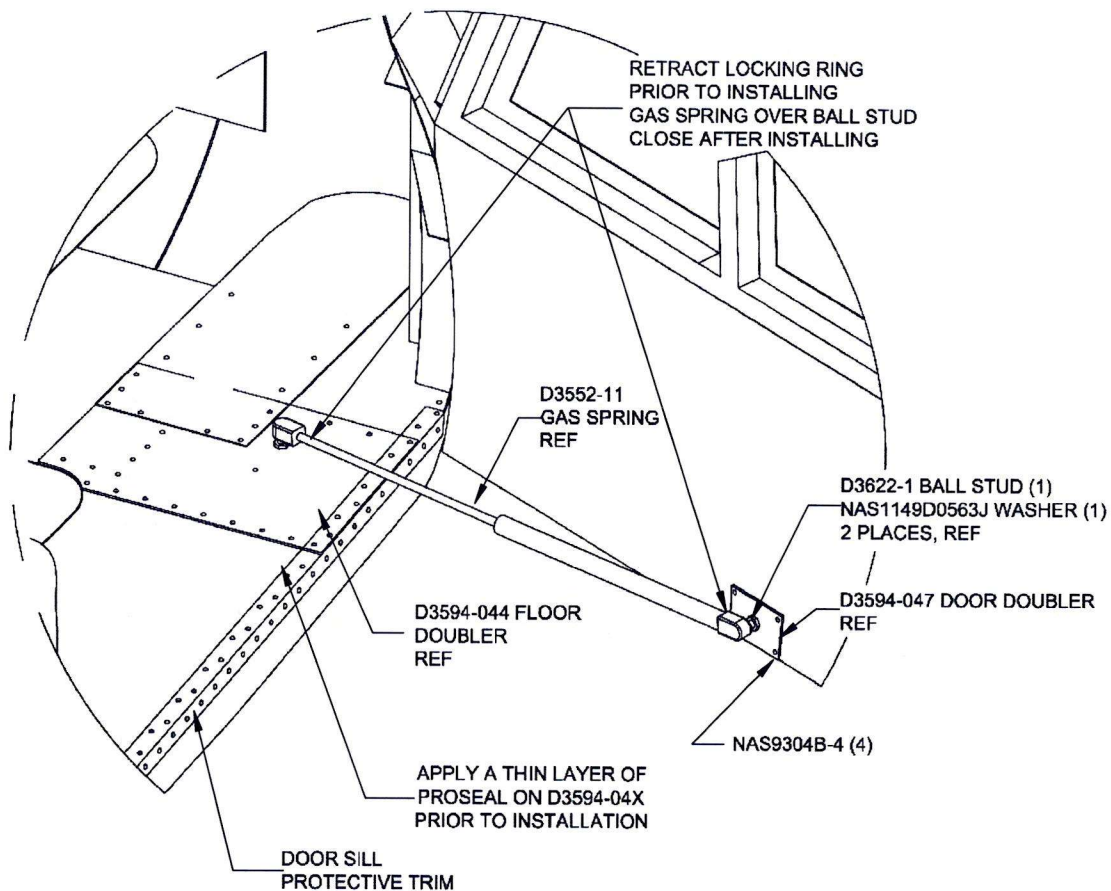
INSIDE DOOR SKIN CUT OUT (REF)
